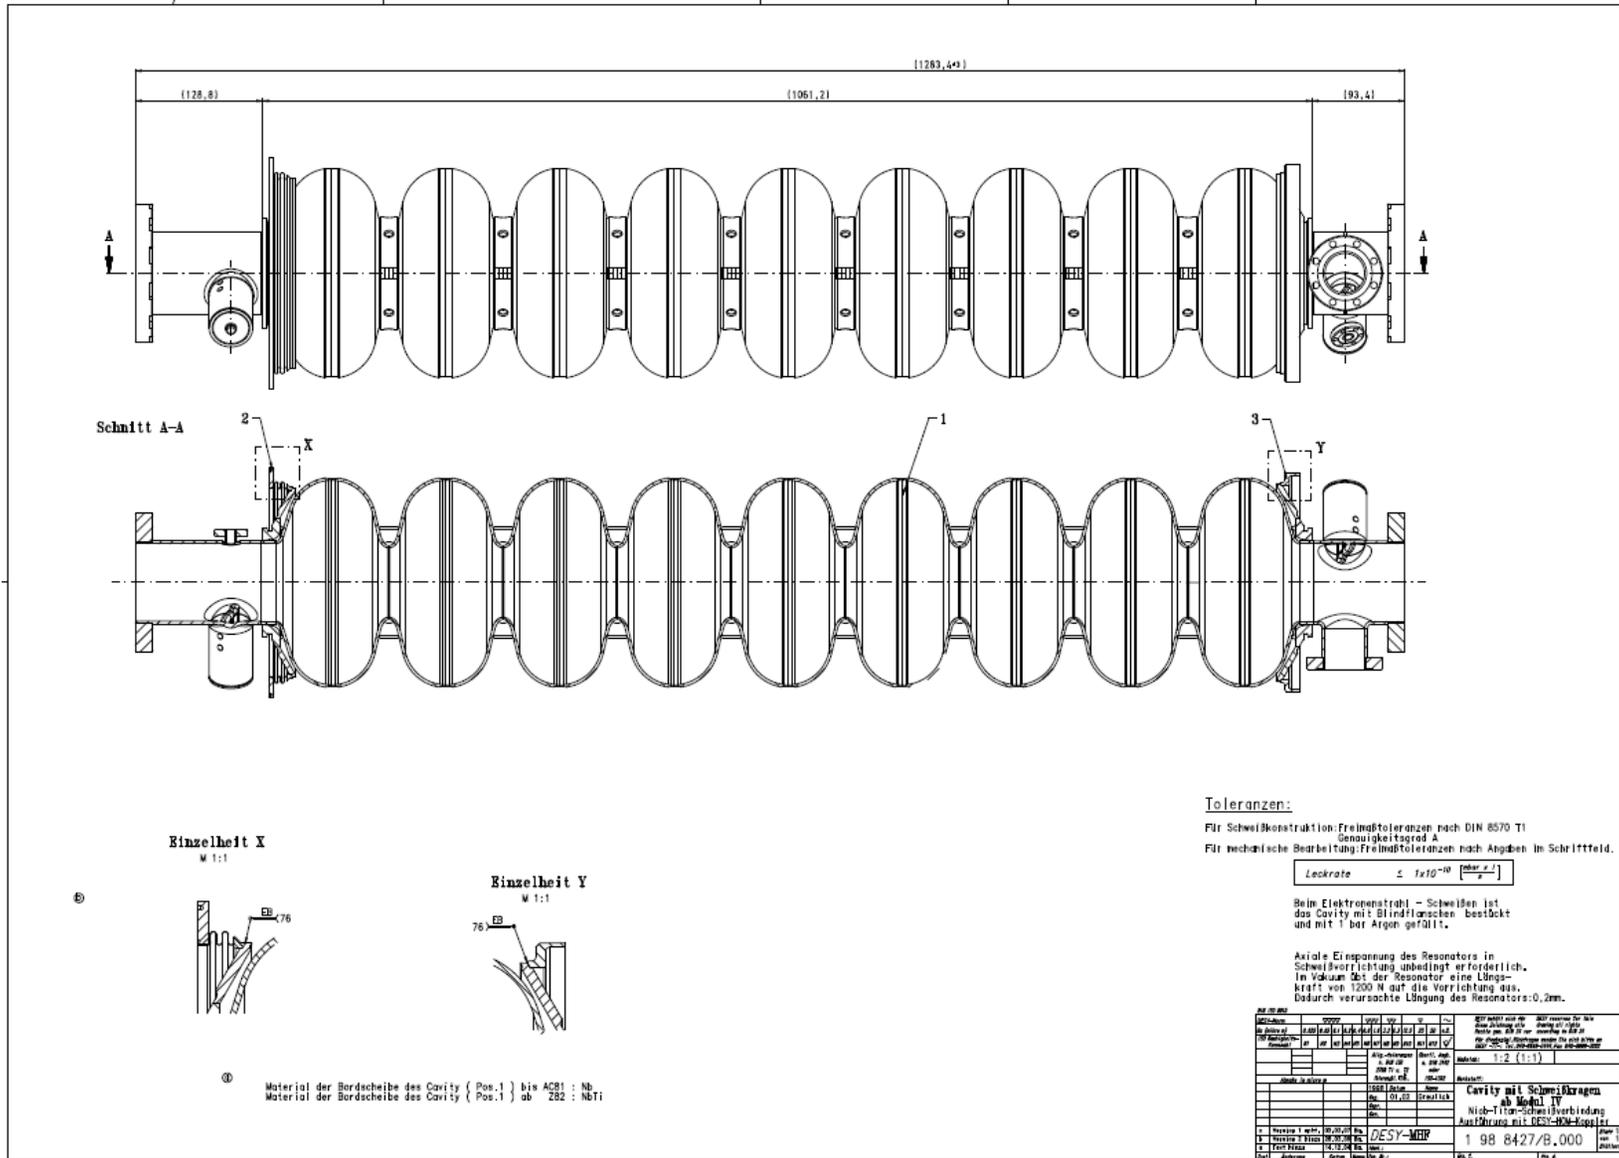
RF Cavity Assembly (DESY drawing 1-98-8427/8.000)
